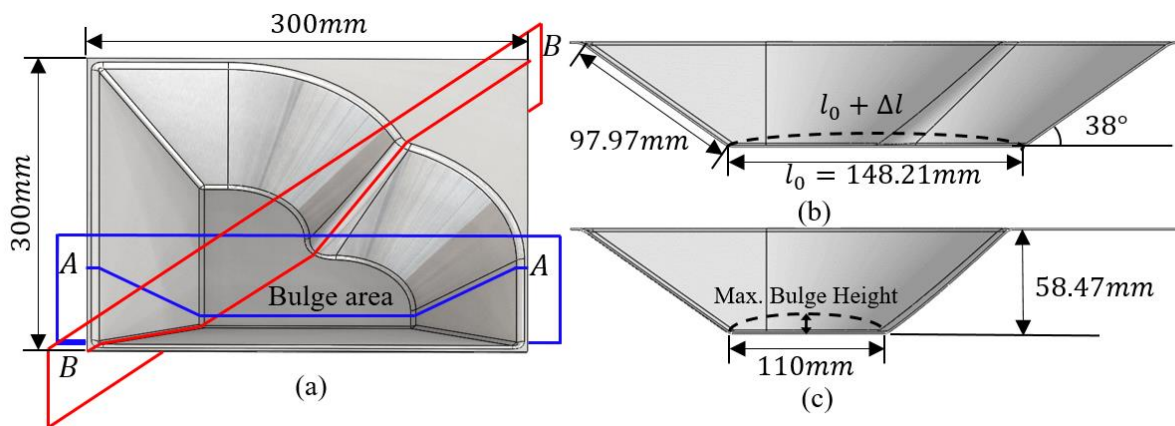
Heart shape part (a) cross-cut planes used for measuring the dimensional accuracy, (b) cross-section A-A, and (c) cross-section B-B
